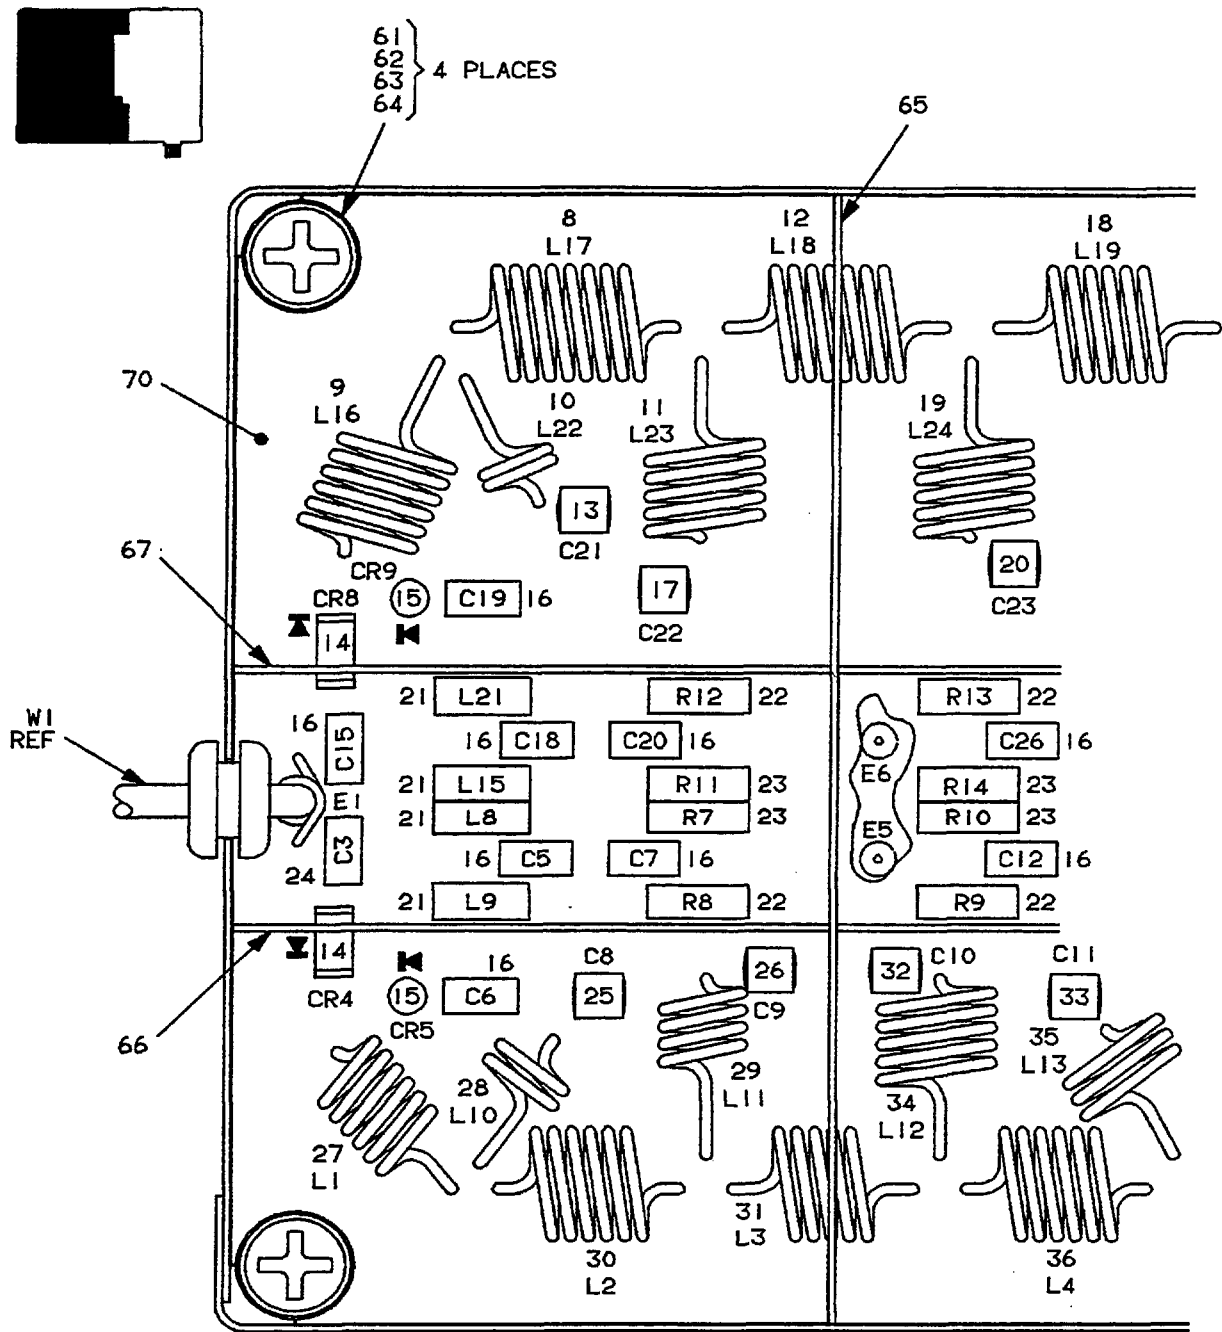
Low Band Filter Module Assembly (Sheet 1 of 3)
